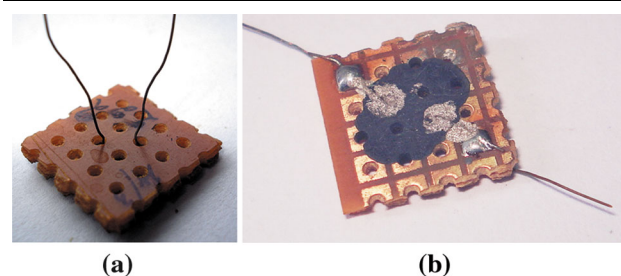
Photoimages of PCB (a) with copper wire insertion and (b) with complete sensor device fabrication.
